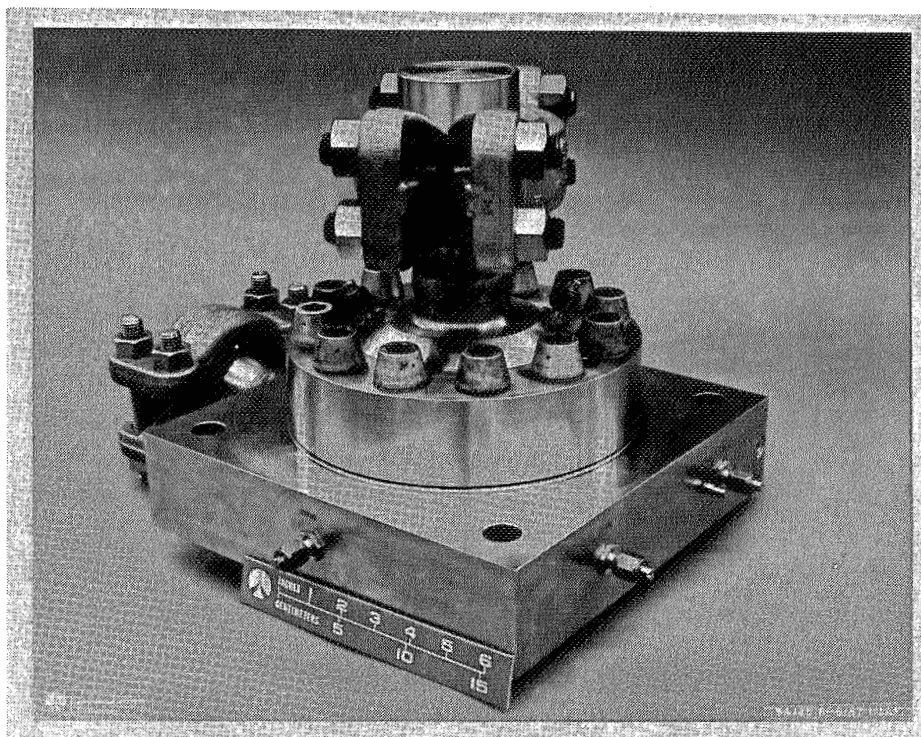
LOX Dome Joined to Fuel Manifold, 3.5-Inch Combustor
